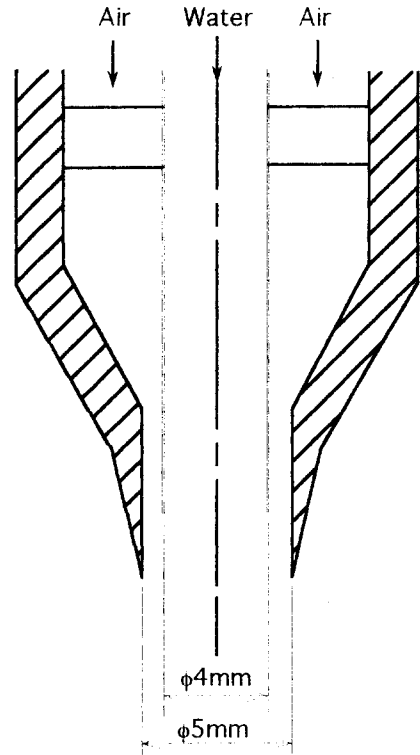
Cross sectional view of the coaxial air assist nozzle
